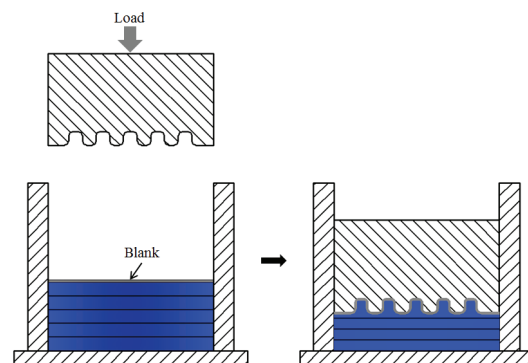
Rubber forming process for manufacturing bipolar plate.
